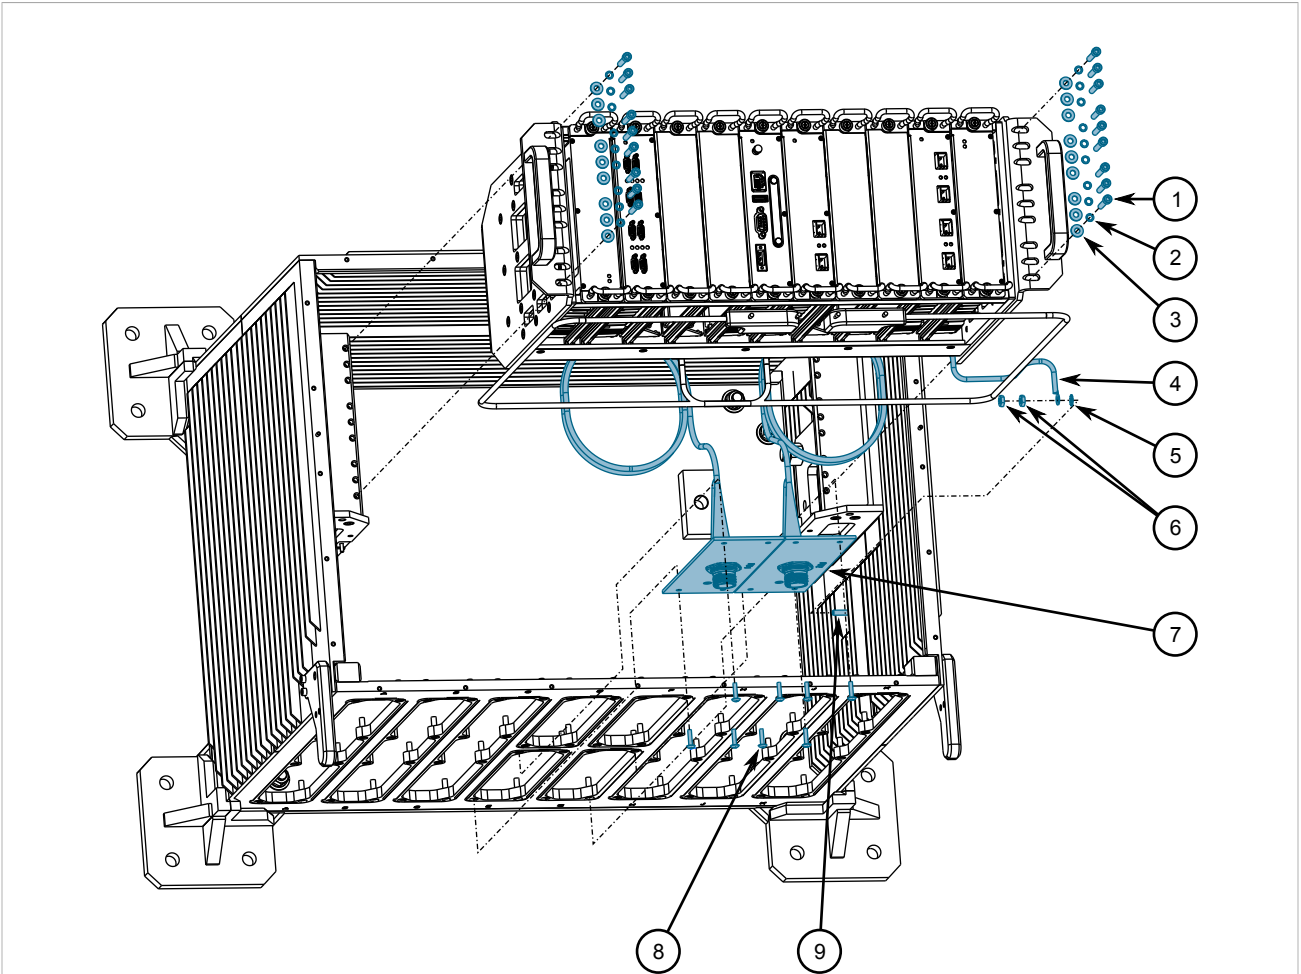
MX5000 and RUGGEDCOM MX5000RE Assembly
